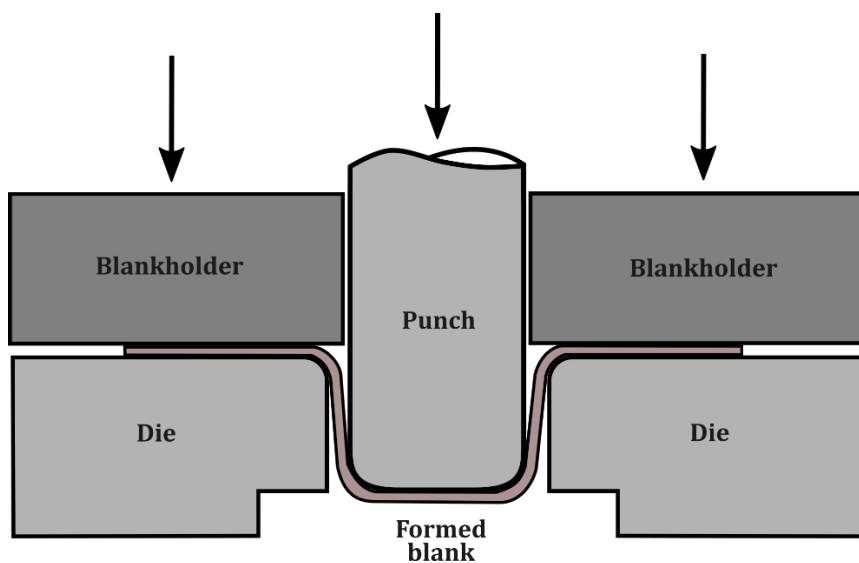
Deep drawing operation with arrows indicating applied blank holder force and punch force.
